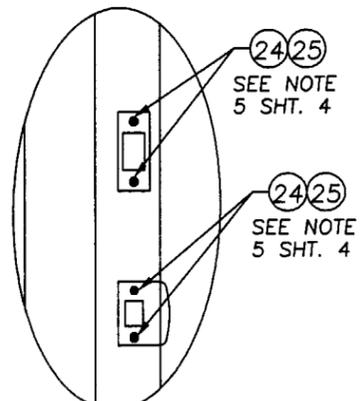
DETAIL G HINGE TO JAMBS & DOOR SEE NOTE 5 SHT. 4
